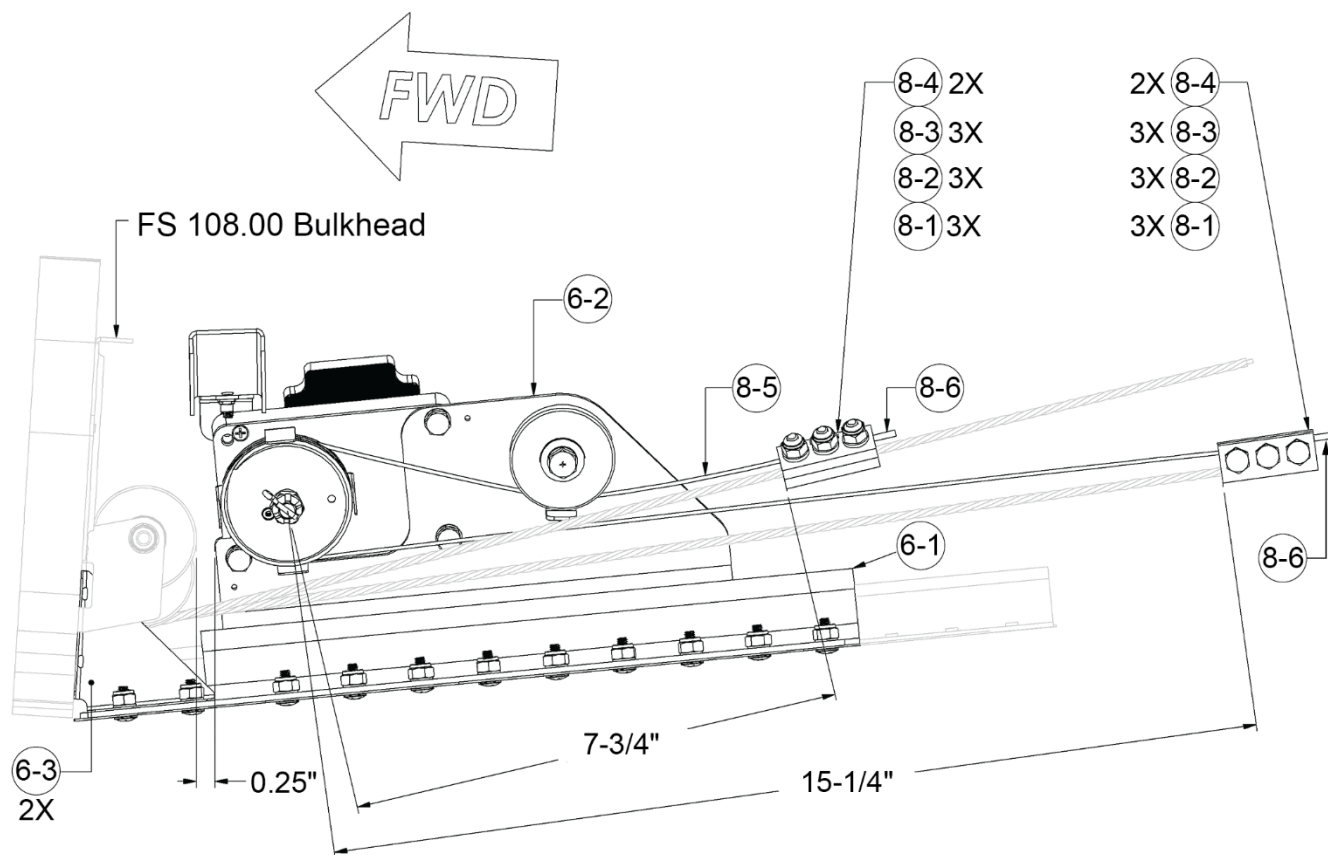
Connecting Bridle Cable to Lower Elevator Control Cable
